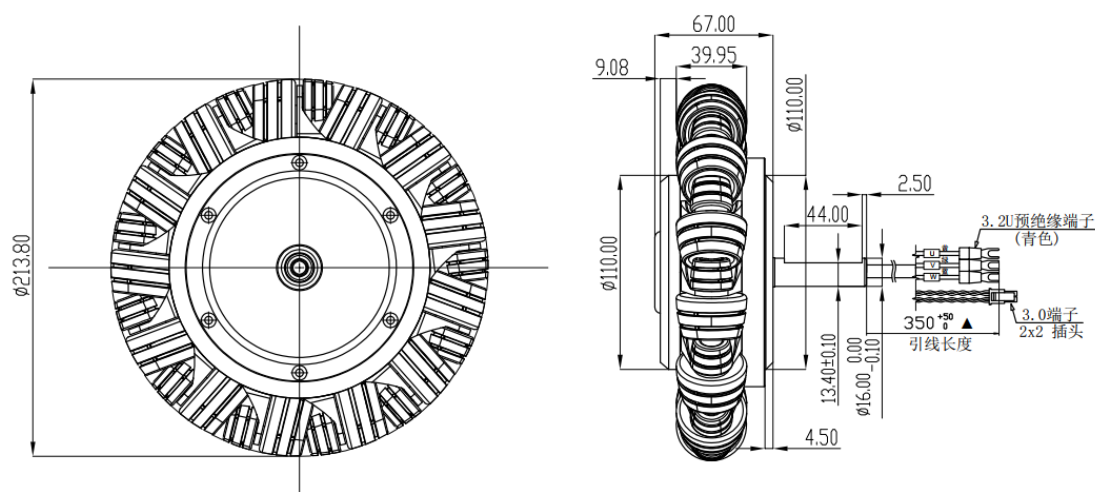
8 inch 7 Nm hub motor (omnidirectional wheel) mounting size
